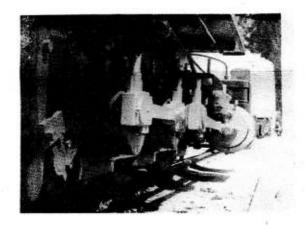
PHOTO Illustrates positioning of counter weight, side rod and main rod.
